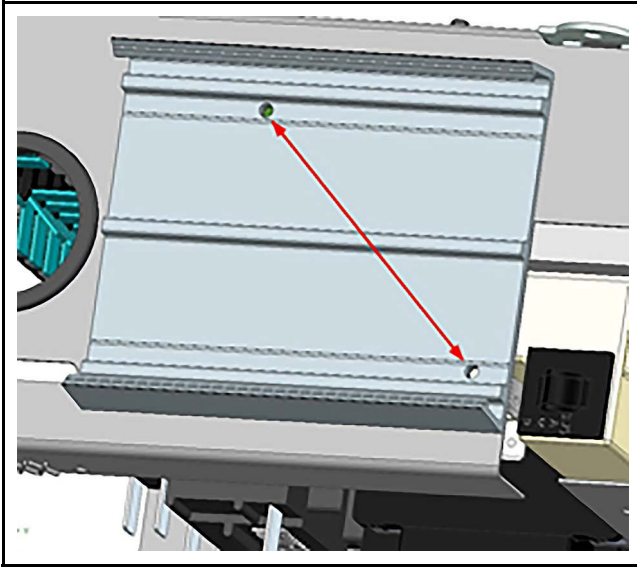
Location of Drilled Holes on the Mounting Base (SM Control Box Top View)
